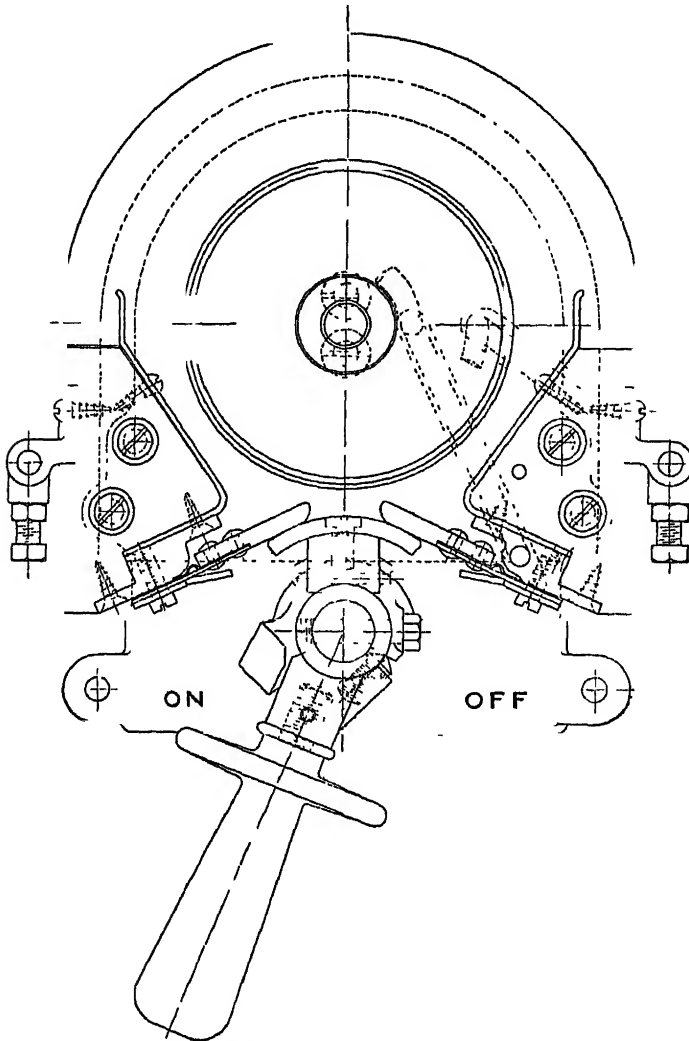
Dick, Keir, & Co.'s Circuit Breaker, Type A 60, form D
